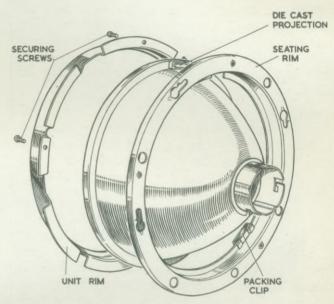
Light Unit assembly for Lucas Headlamp Model F700 Mark III
